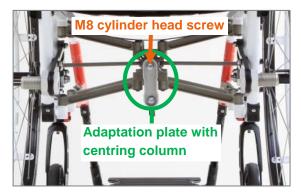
Folding mechanism with adaptation plate and centring column (wheelchair from behind)
